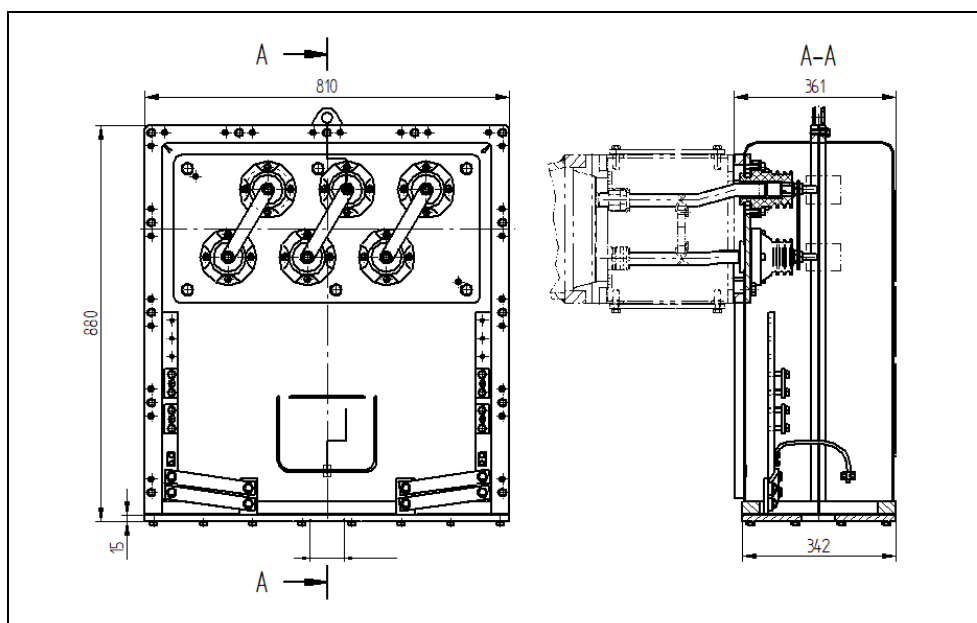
Standard terminal box 9-103 732.60 (6.6 kV)
